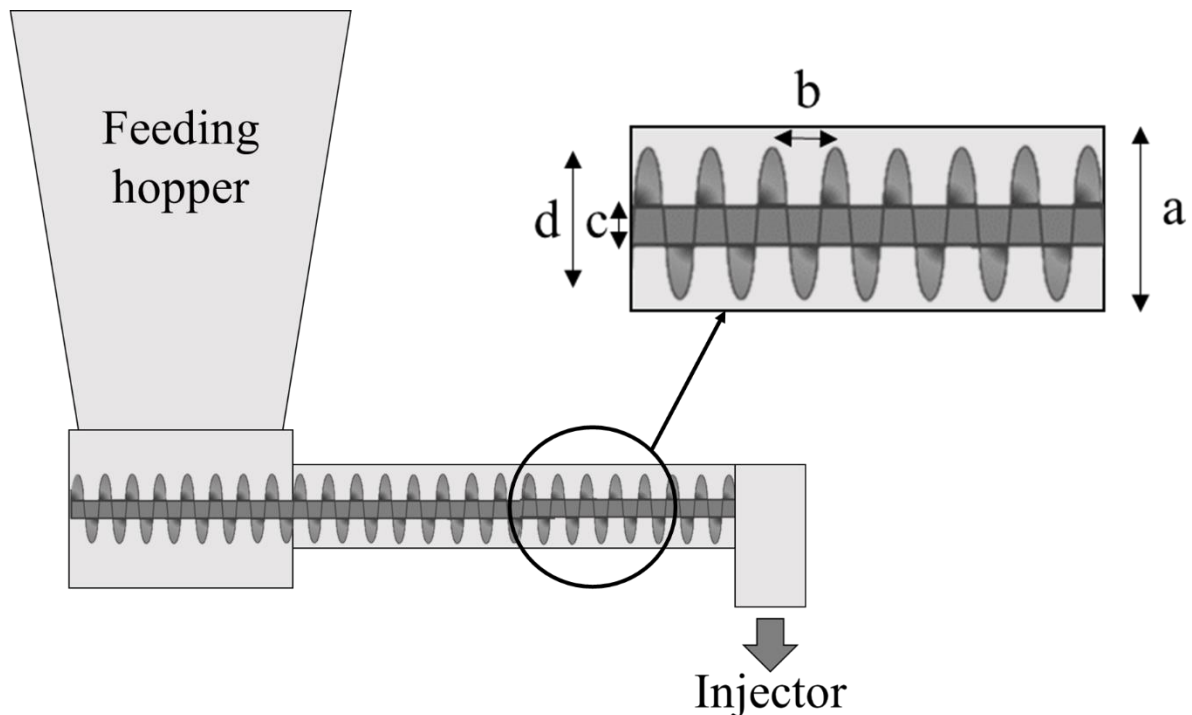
Location of the screw driver in the pilot and zoom on the screw to show the dimensions (not to scale). a, casing diameter; b, pitch; c, core shaft; d, screw flight
